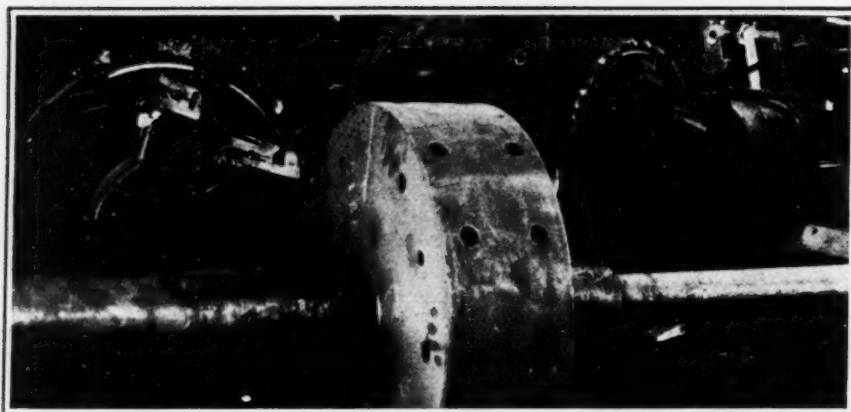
Mandrel Used for Swinging Motor Case in Lathe
